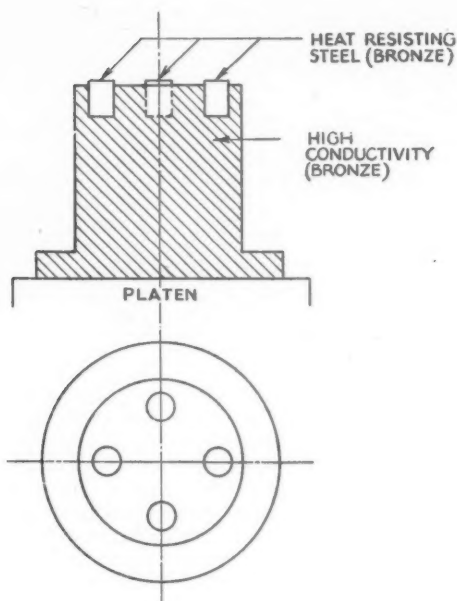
Tools for making pressure welds in a projection welder.
